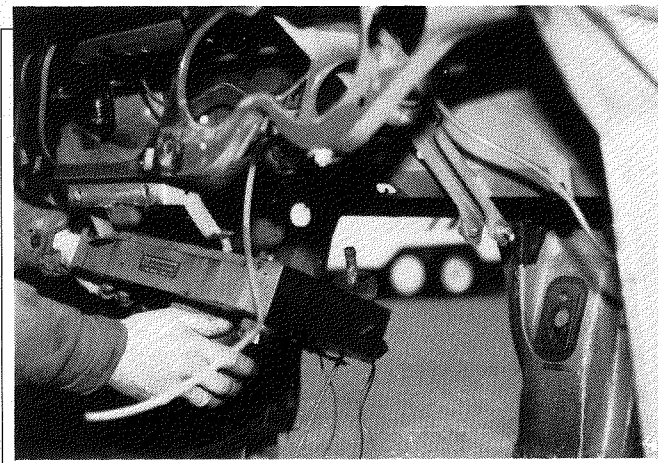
Move back inside the car, disconnect the electrical connectors, then pull the heater back and down, bringing the water inlet and outlet tubes through the bulkhead. The motor fan and tubes have a foam seal which can stick so a firm pull will be needed. There is always a certain amount of water left in the heater radiator core so watch out for this. It's always rusty and can stain things badly. Drain this and store it with vent, hosing and control mechanisms.
